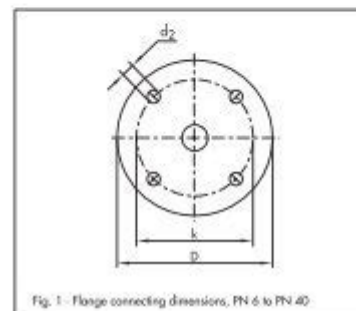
Flange connecting dimensions, PN 6 to PN 40
